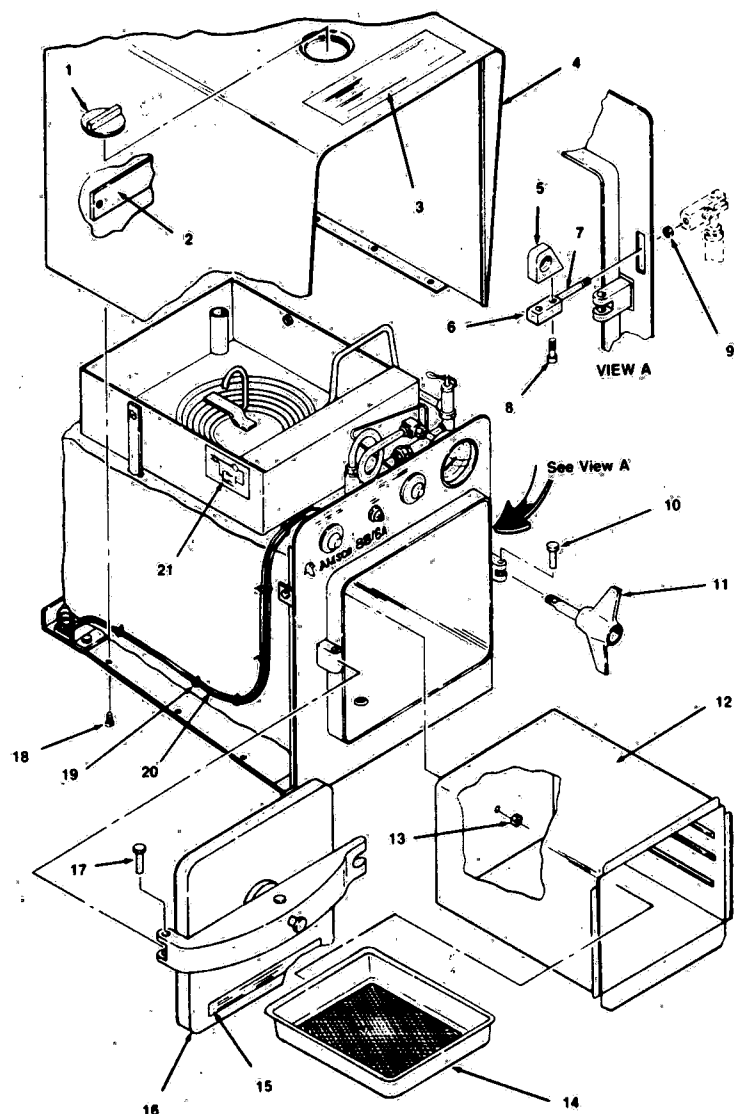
GENERAL ASSEMBLY — PART 1 OF 4.
